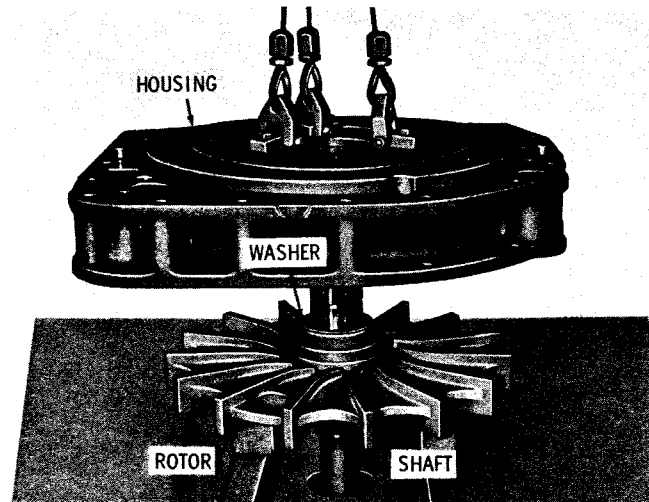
Installing retarder housing onto retarder rotor and turbine shaft (CBT, CLBT, VCLBT, after S/N 35992)
